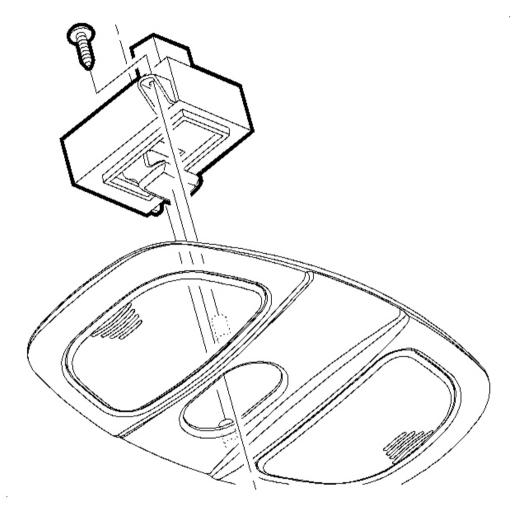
Removing/Installing Sunroof Switch With Fasteners Courtesy of GENERAL MOTORS CORP.
